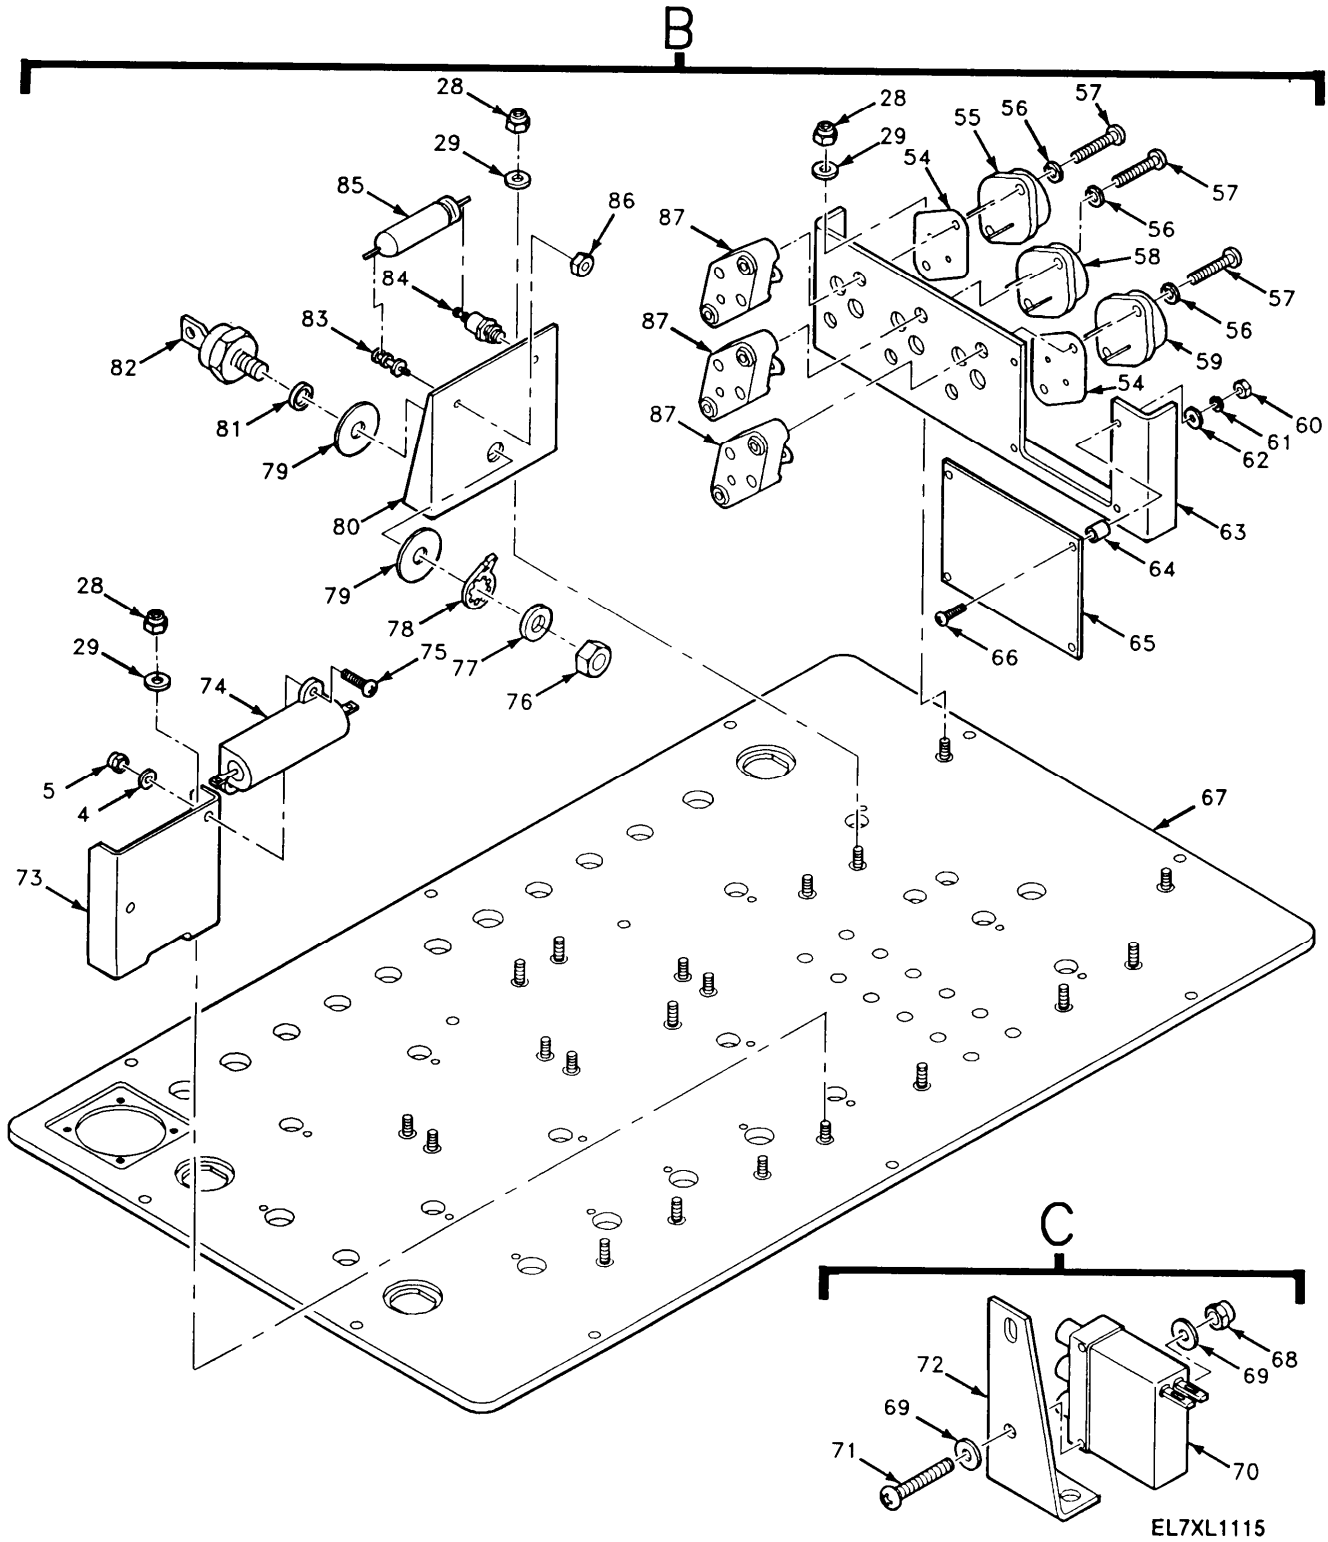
Test Adapter Front Panel Repair. (Sheet 3 of 3)
